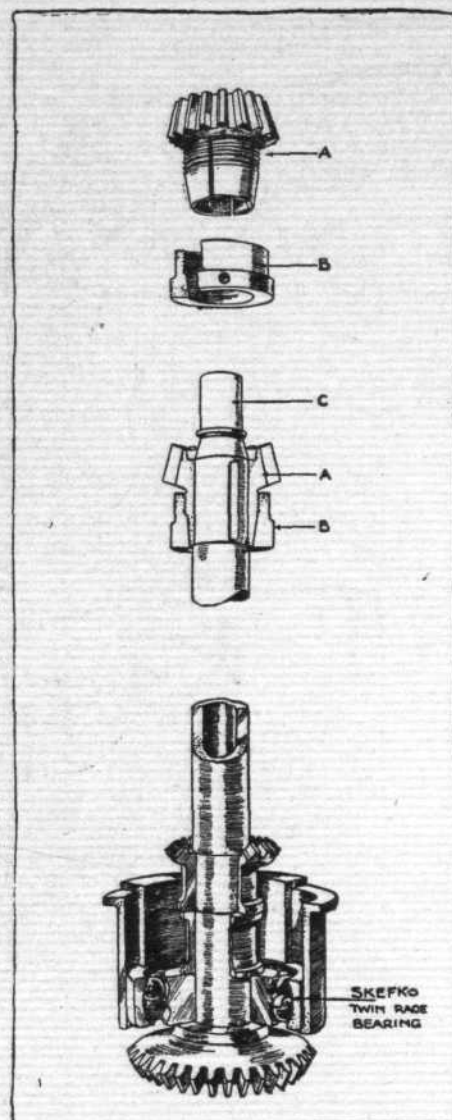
Method of attaching the camshaft driving pinion to the top end of the vertical driving shaft, and the arrangement of the Skefko twin race ball bearing on bottom end of vertical shaft.
